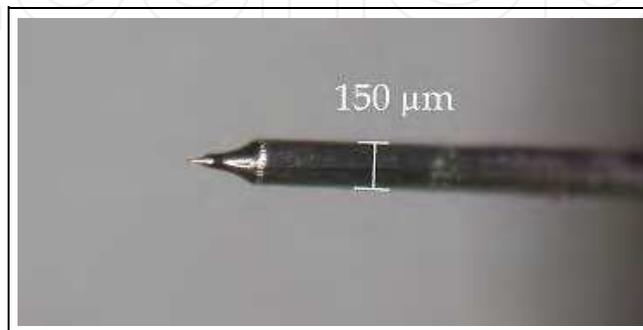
Image of the tool to produce the micro injection mould with a top of $D < 5\ \mu\text{m}$.
